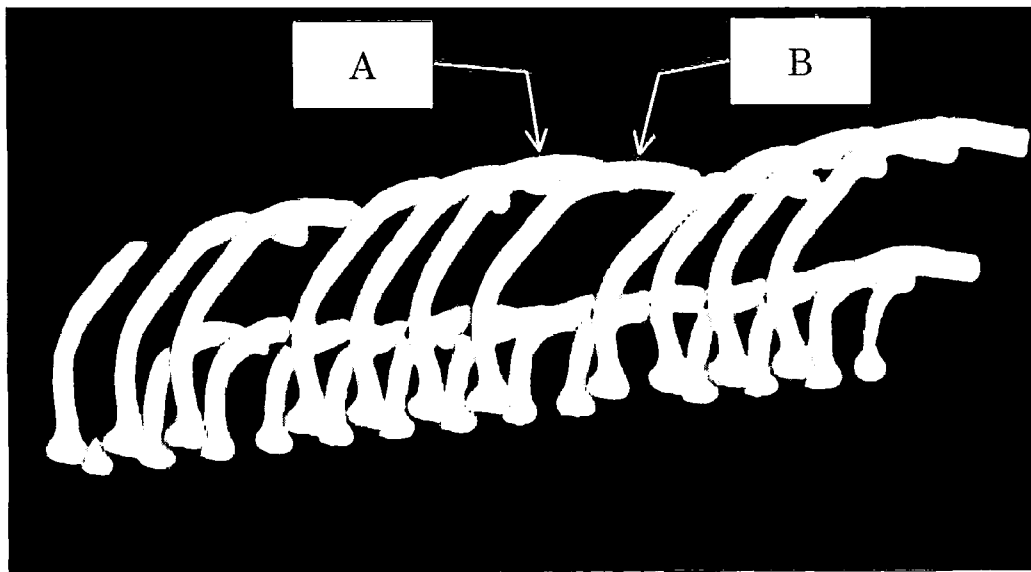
3 dimension image of the bonding wire on the 1st bonding side of stagger type.
